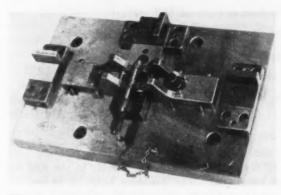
Spherical groove is milled between the ears in this fixture. When fixture is turned 90° , a second milling operation is performed. Gage blocks on the fixture are used to set the tools for the roughing and finishing cuts.
